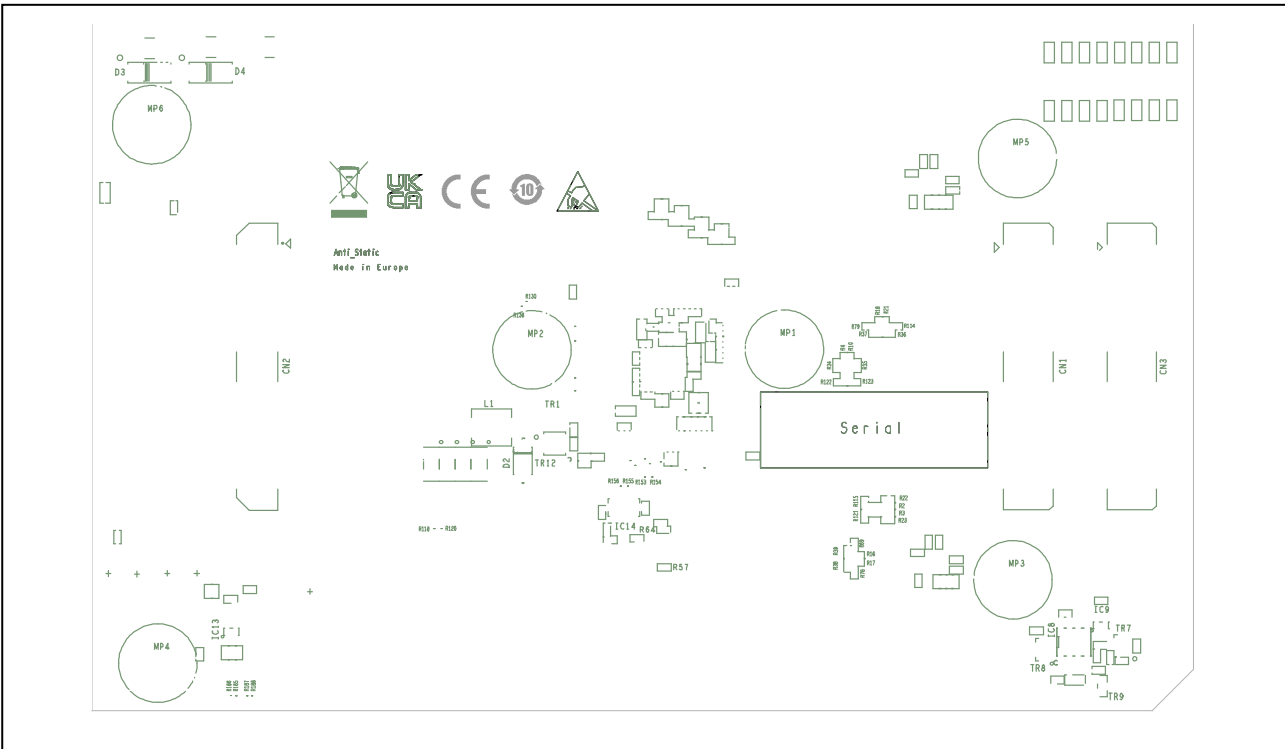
D018177_06_V01 Placement of connectors on bottom side
